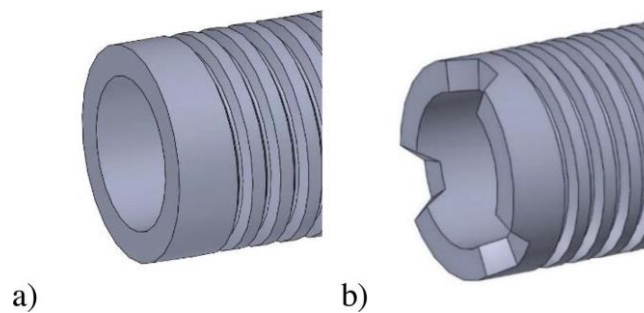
A) Standard left-hand threaded RFSSW shoulder and B) modified version with grooves on the bottom surface. (Shen et al. 2018)
